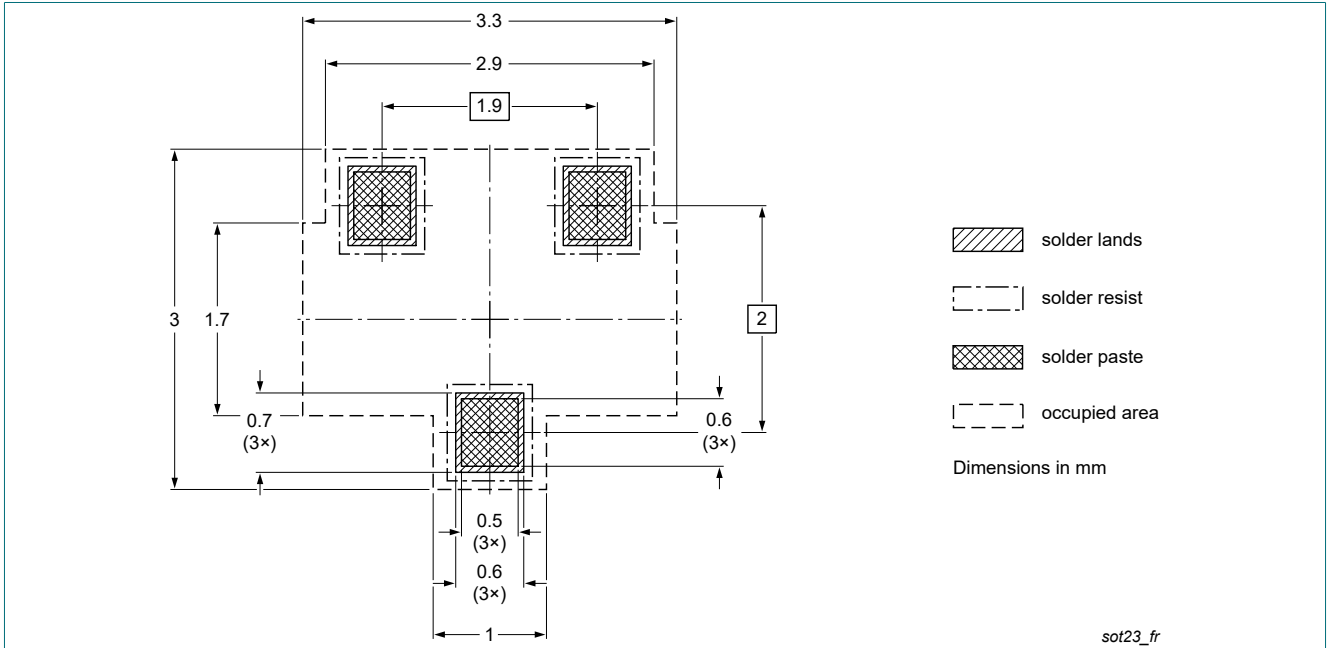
Reflow soldering footprint TO-236AB (SOT23)
